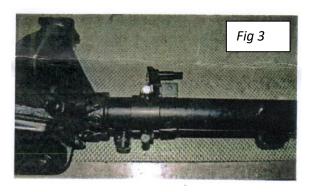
RH axle brackets in approximate position. Note: Fits between handbrake and brake hose brackets. File weld as required to allow good fit.
